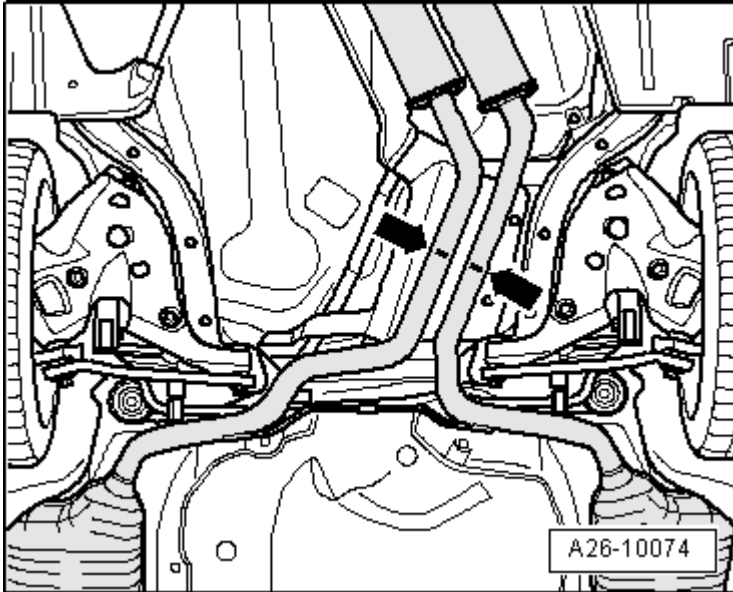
Separating Exhaust Pipes At A Right Angle At Separating Point Using Chain Pipe Cutter VAS 6254
